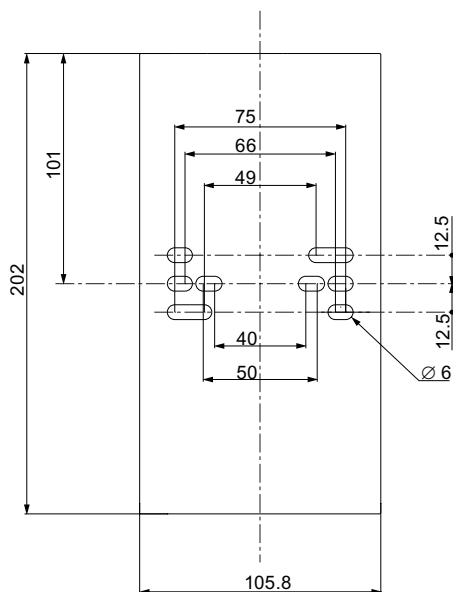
Hole drilling template: Fuse switch disconnectors size 00
